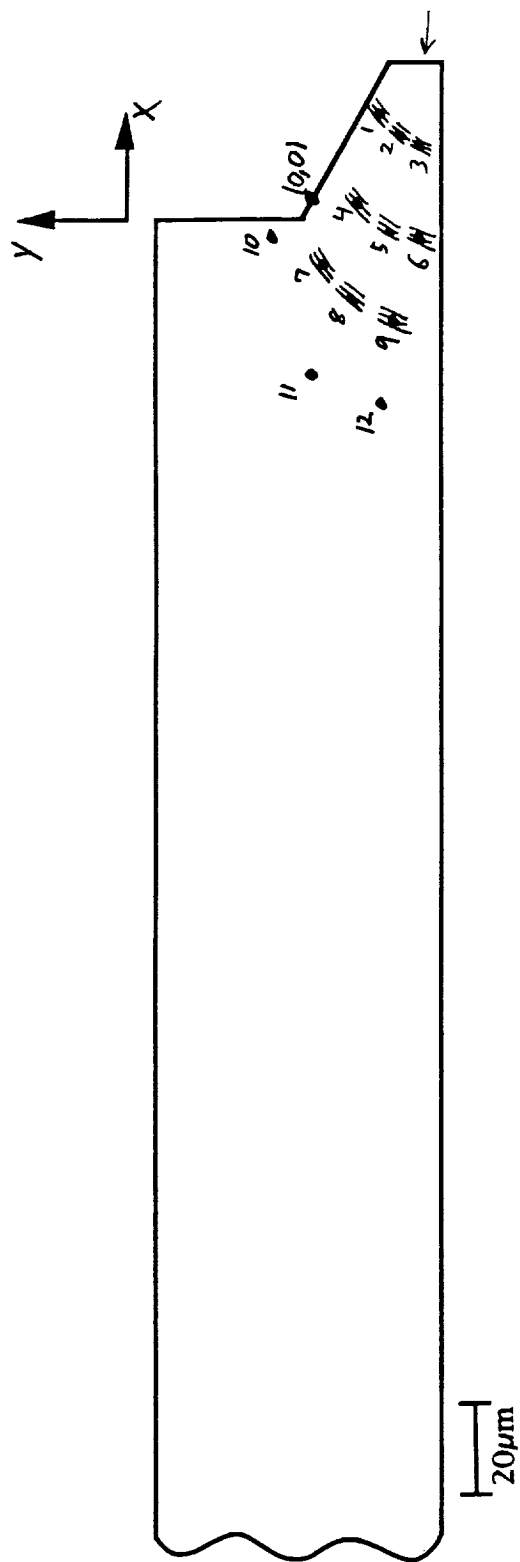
Rivet hole schematic: Upper rivet row, hole number 3J2, fatigue crack growth is in the aft direction.
